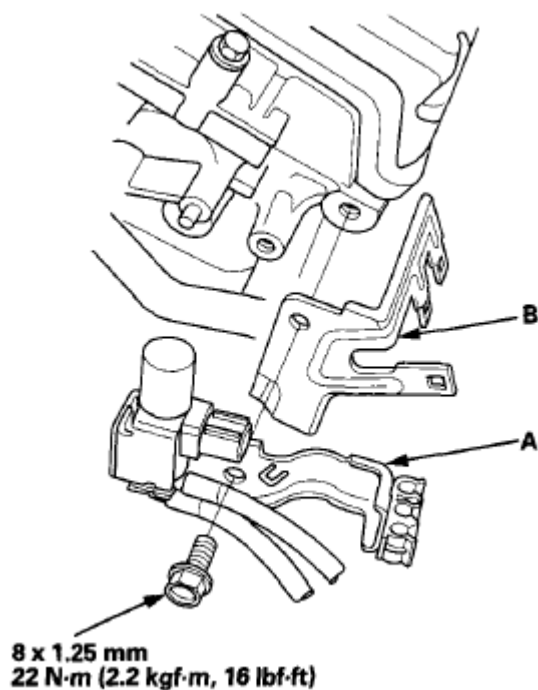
Installing Engine Mount Control Solenoid Valve Bracket And Harness Clamp Bracket With Torque Specifications
